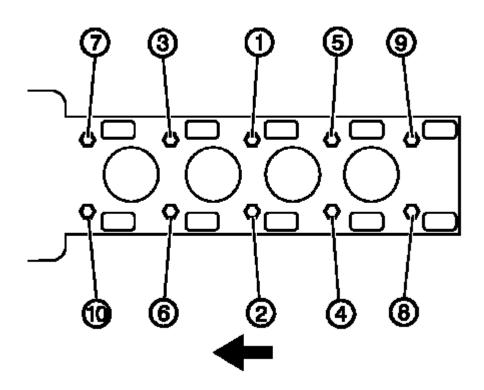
View Of Cylinder Head, Bolts & Gasket Courtesy of GENERAL MOTORS CORP.
